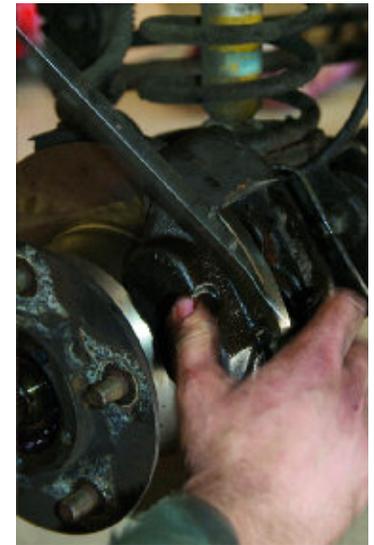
Before inserting the brake pads, use a large pry bar to push the caliper pistons back into the caliper if needed. Open your brake reservoir cap first and check the level as you go. Note: Check caliper pistons for any surface corrosion. If any, you'll need to rectify this first. Stay tuned for rebuilding your brake calipers in the next issue.
